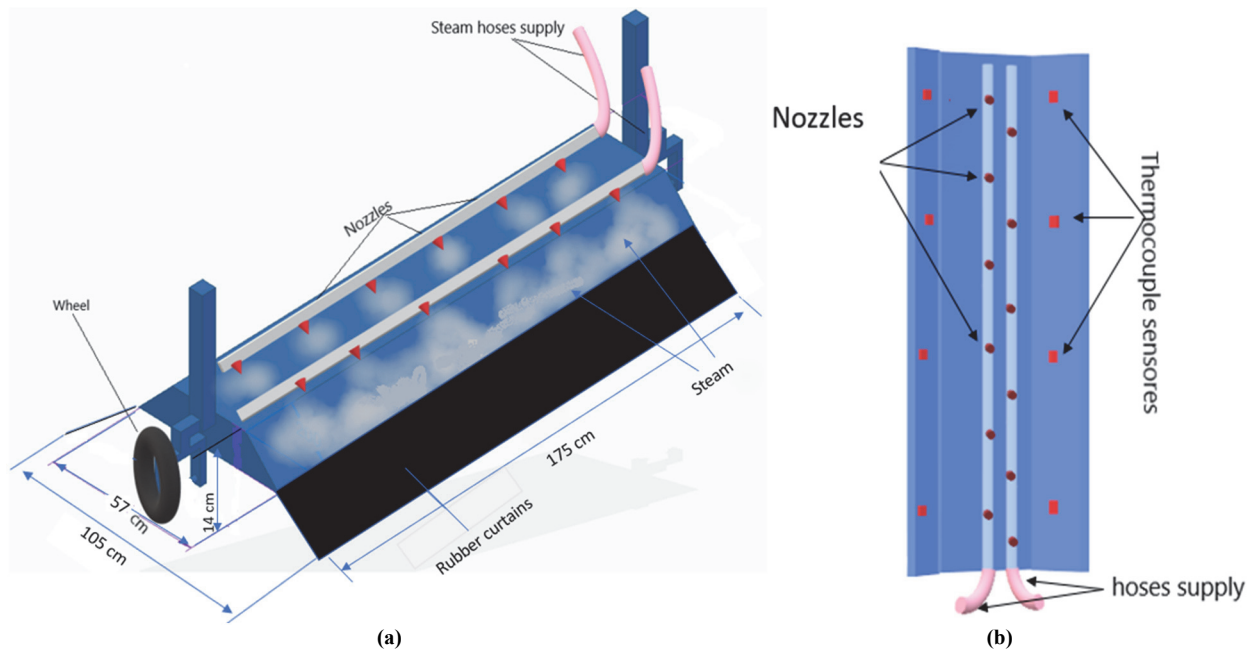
Frame design of the boom section; (a) top view, (b) bottom view presenting the thermocouples location.
